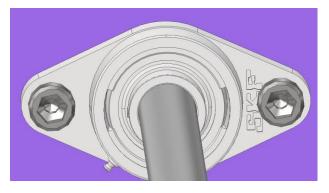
FYTJ 30 TF Oval flanged ball bearing in the assembly.
